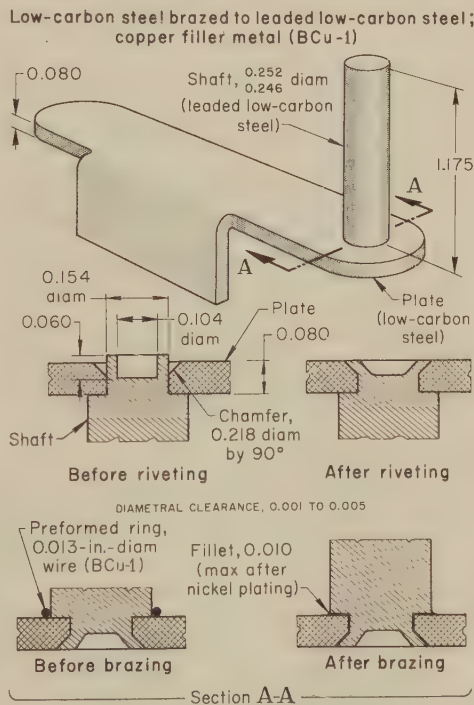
Brazed riveted assembly for which size of filler-metal fillet was controlled by use of a preformed ring of filler wire of proper diameter (Example 560)
